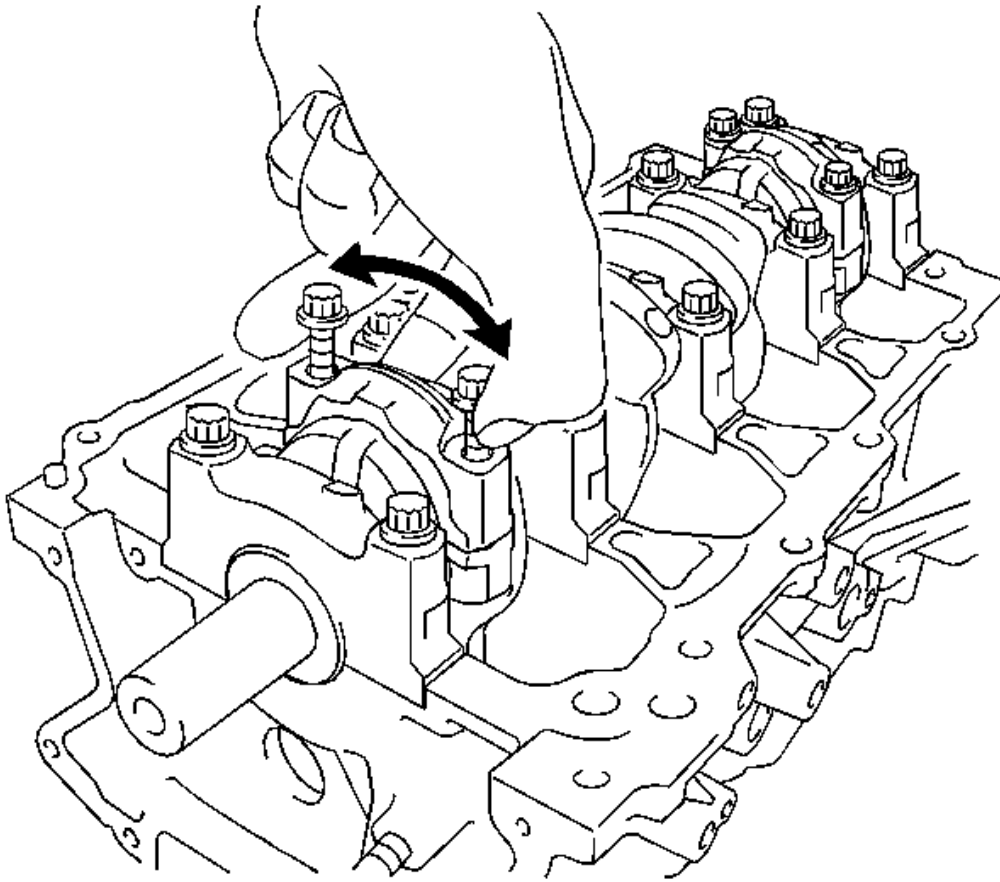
View Of Connecting Rod Cap & Lower Bearing
